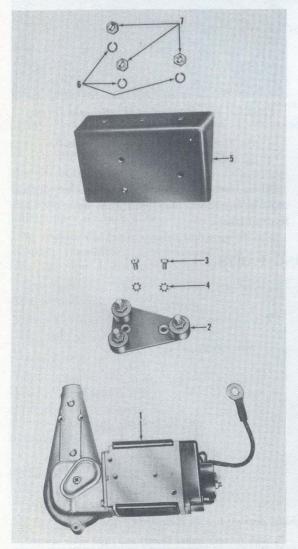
B-Windshield Wiper Motor and Mounting Brackets.
